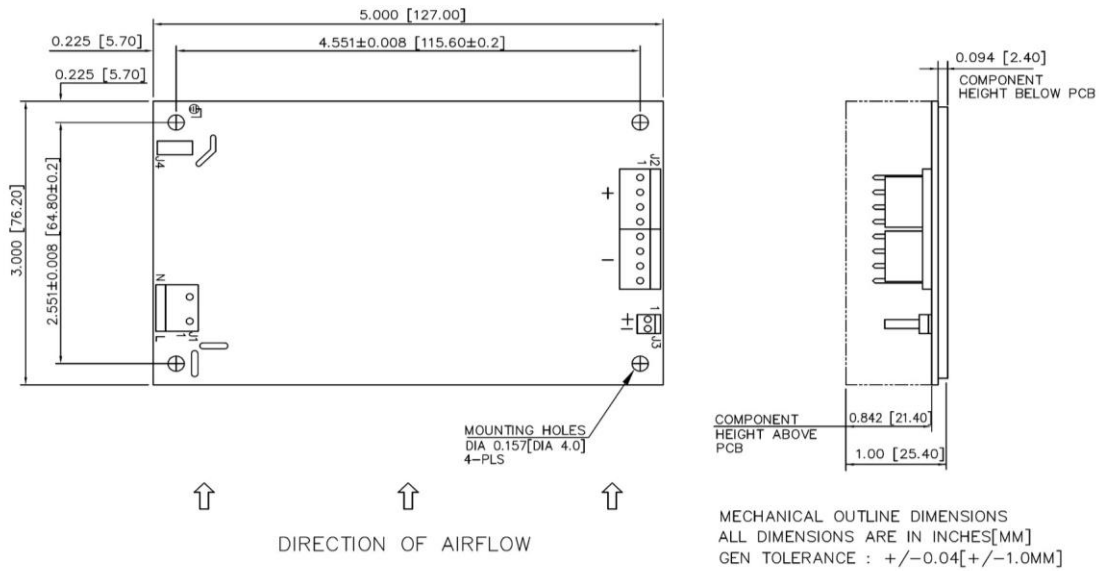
Mechanical Drawing - Molex Header (Option 2)
